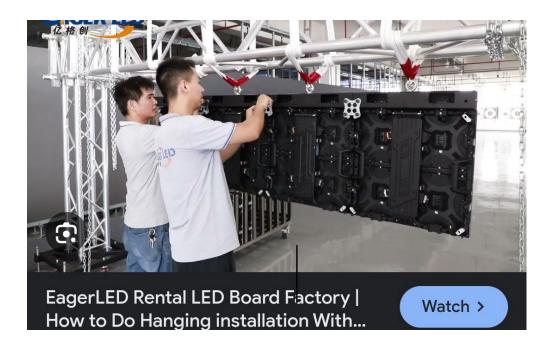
Shows individual panels being assembled together at a customer facility, hanging from a ceiling structure.
